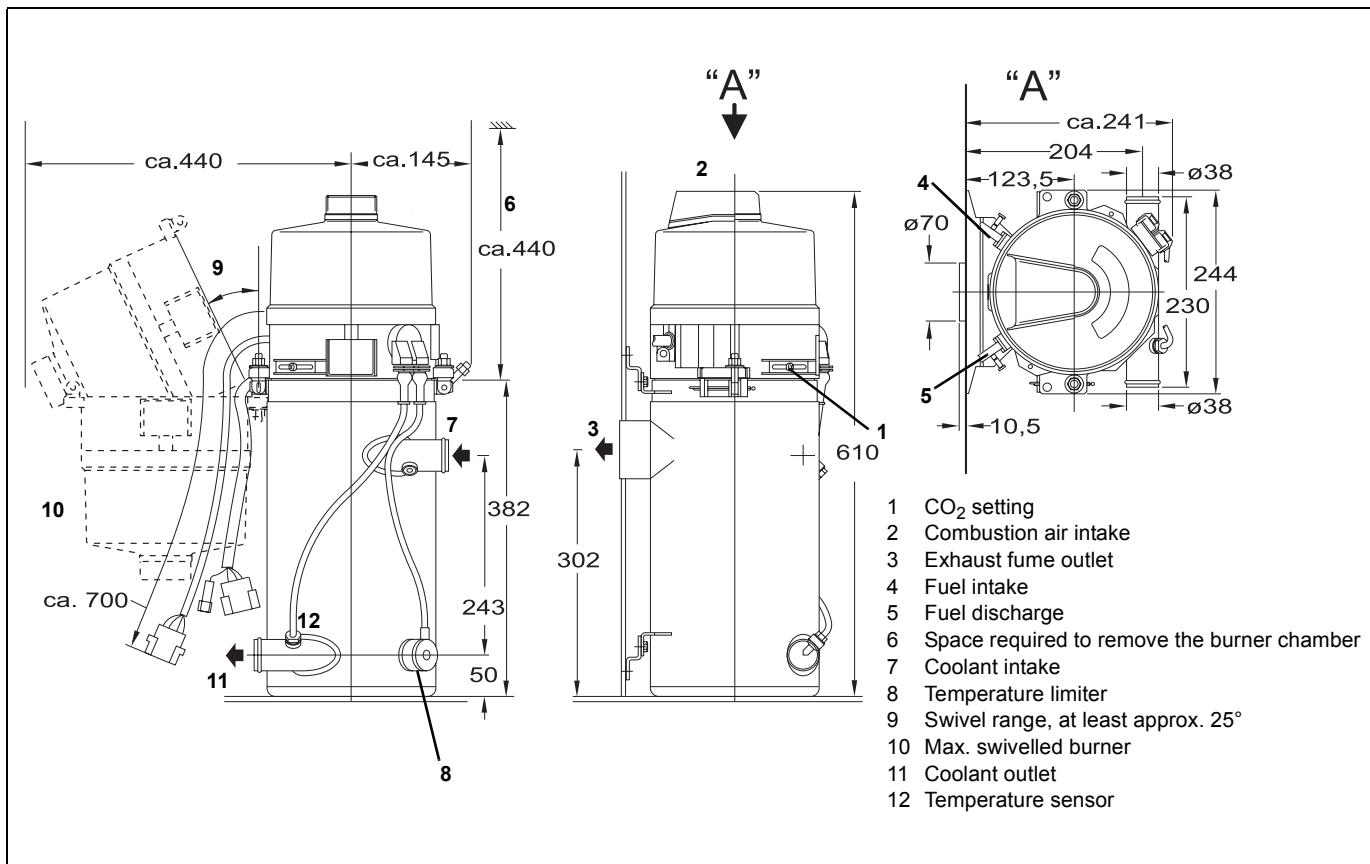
Dimensions of the Thermo 231 / 301 heater (vertical installation)
